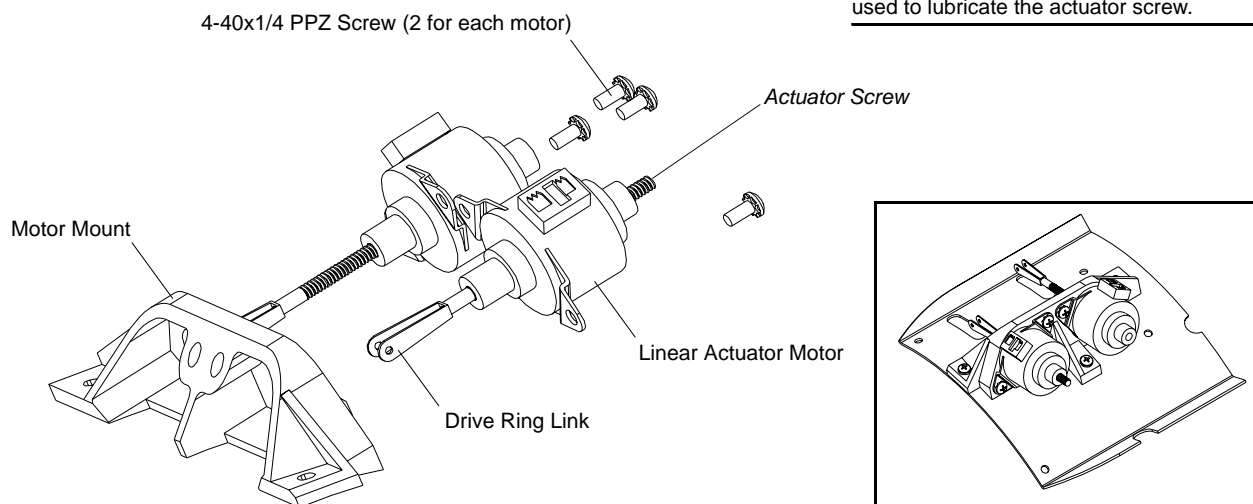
Magenta/Blue Color Bulkhead - Linear Actuator Motors
